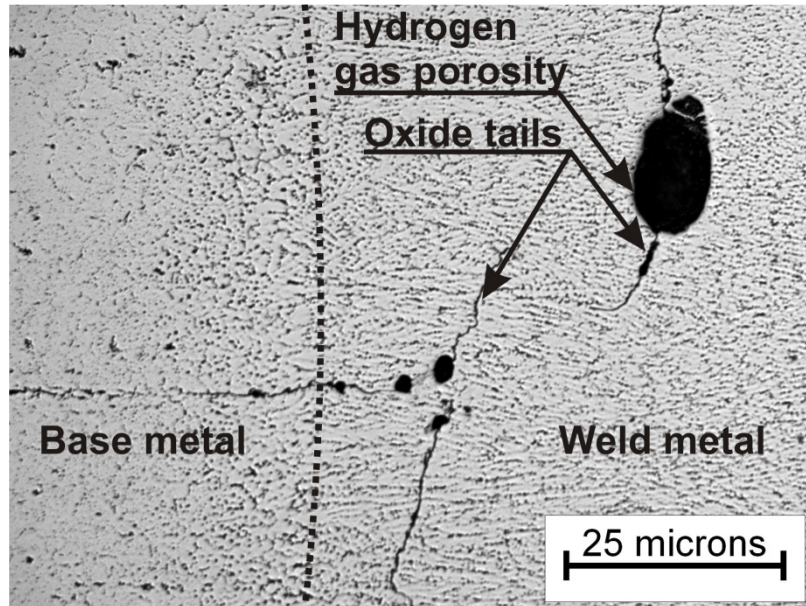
Photograph of oxide tails at the fusion boundary in a DSA seam weld produced using a 2 kW welding power and 10 mm/s welding speed.
